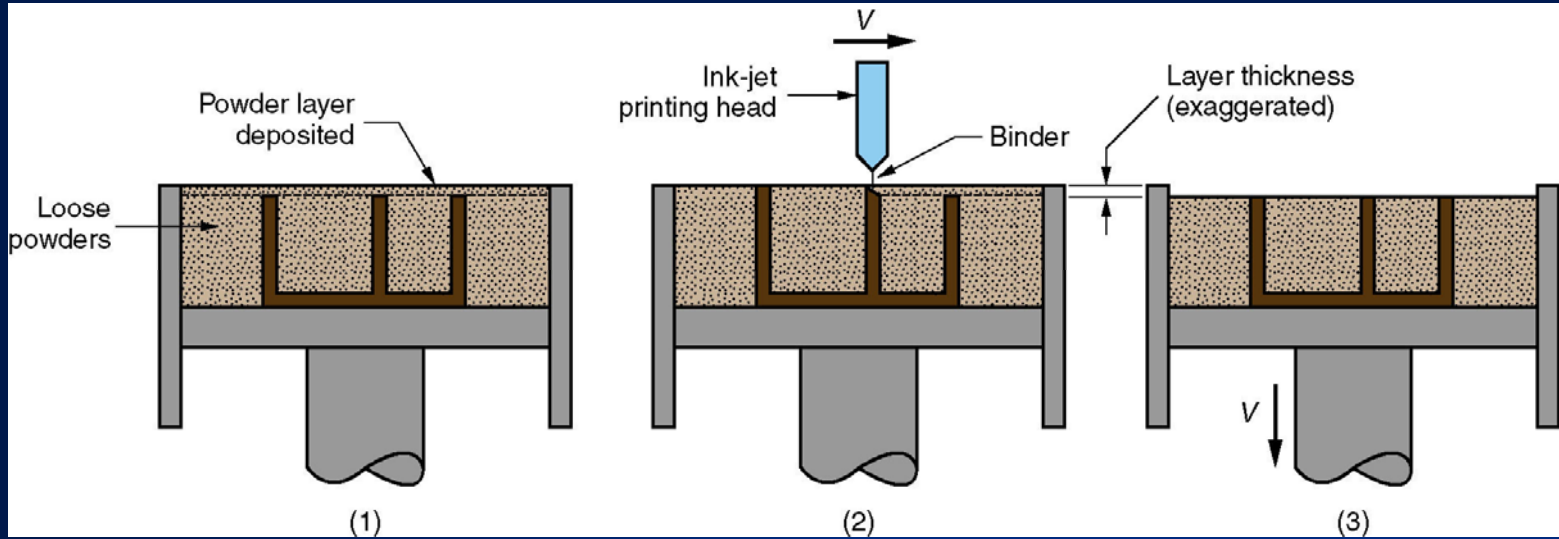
Three dimensional printing: (1) powder layer is deposited, (2) ink-jet printing of areas that will become the part, and (3) piston is lowered for next layer (key:  $v$  = motion)
